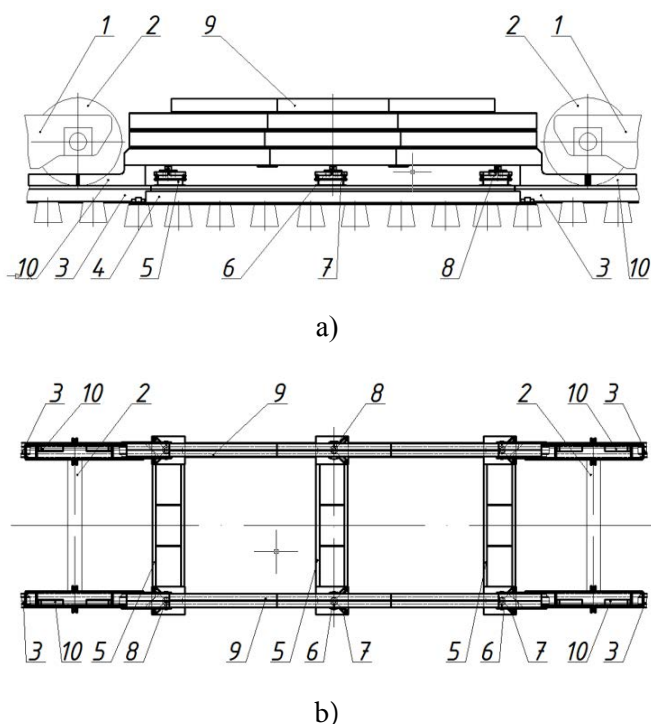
New version of VNKU-60: side view (a); top view (b), where: 1 = railroad cars; 2 = wheelsets of cars; 3 = railroad rails; 4 = load carrier; 5 = weight-transmitting devices; 6 = weight-measuring devices; 7 = strain-gage sensors; 8 = loading devices (hydraulic jacks); 9 = load-receiving devices; 10 = clamps for wheels
